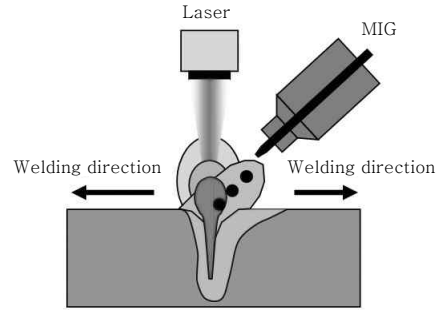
Schematic of laser-MIG hybrid welding process
